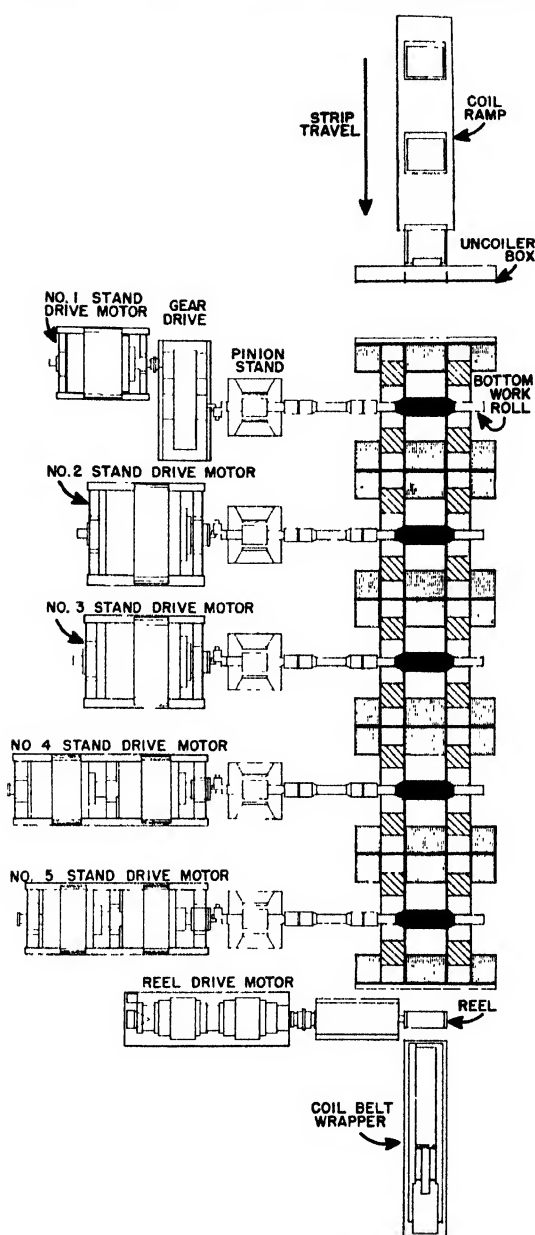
Schematic arrangement of the mill stands and auxiliary equipment comprising a modern five-stand tandem cold-reduction mill. The shaded sections of the drawing represent the mill housings of the five four-high mill stands. Only one work roll of each stand is indicated in black; no other rolls are shown.
